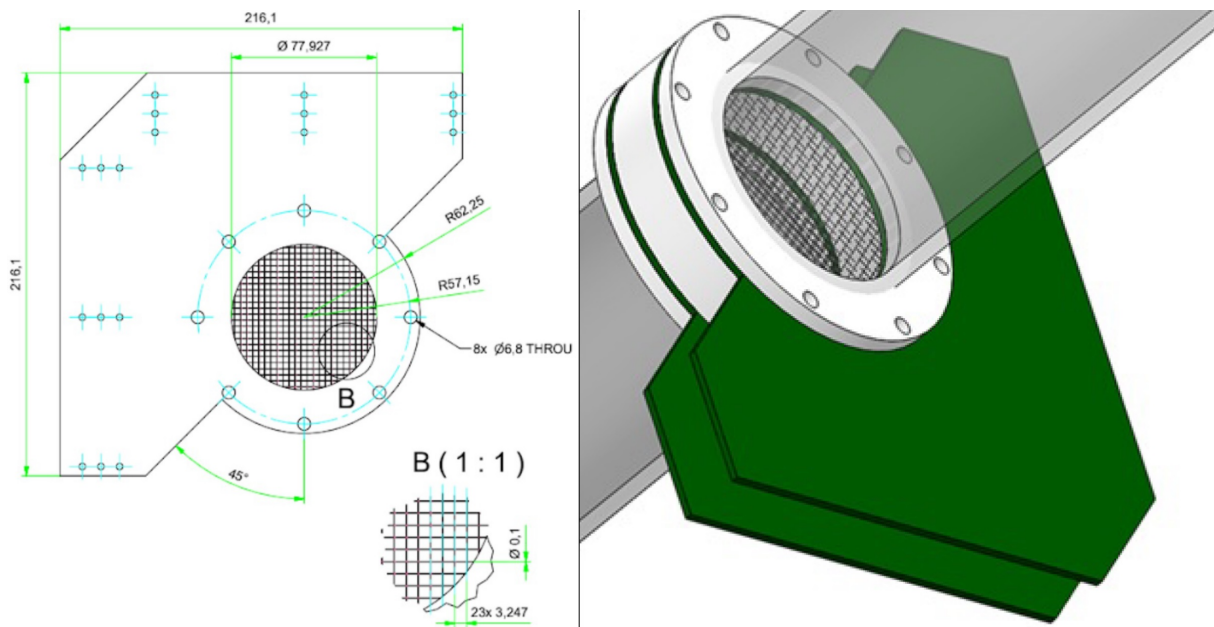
a) Wire mesh sensor computer-aided design with dimensions in millimeters b) Wire Mesh Sensor - Single Pair computer-aided design
